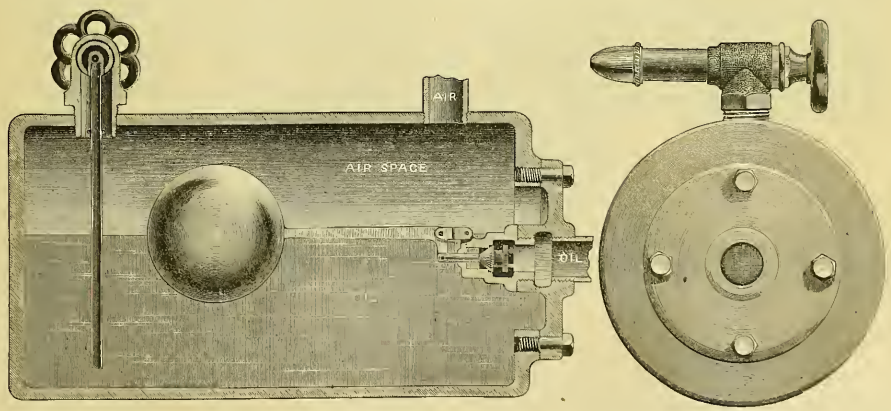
AERATING CYLINDER FOR PETROLEUM BURNER.
